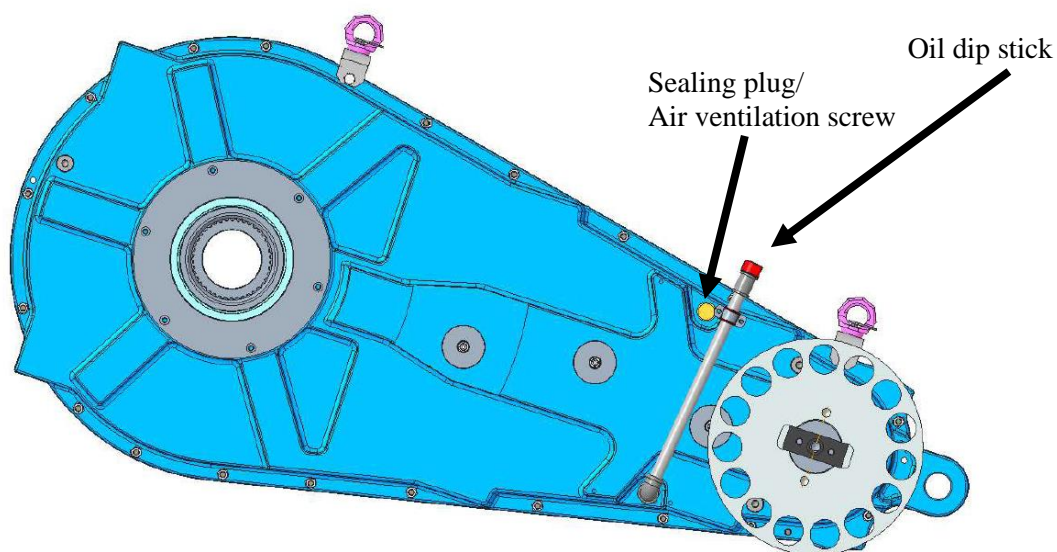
Intermediate gear, oil dip stick and air vent screw, angular mounting position approx. 17°
